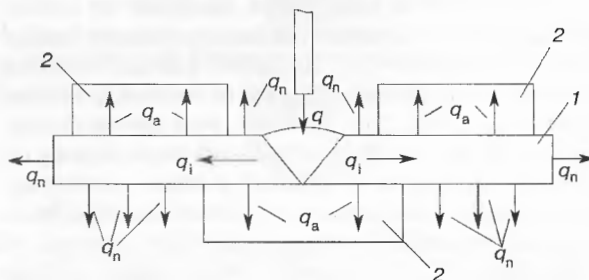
Schematic of welding with forced heat removal: 1 — parts being welded; 2 — fixtures.
